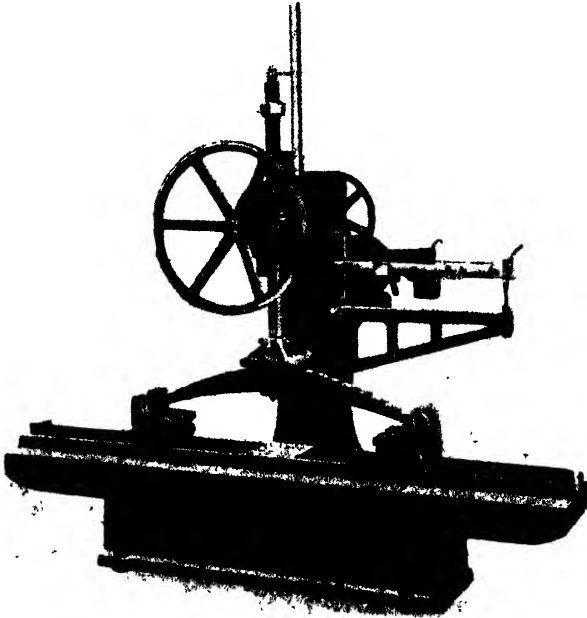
A LAMINATED SPRING STATIC TESTING MACHINE
